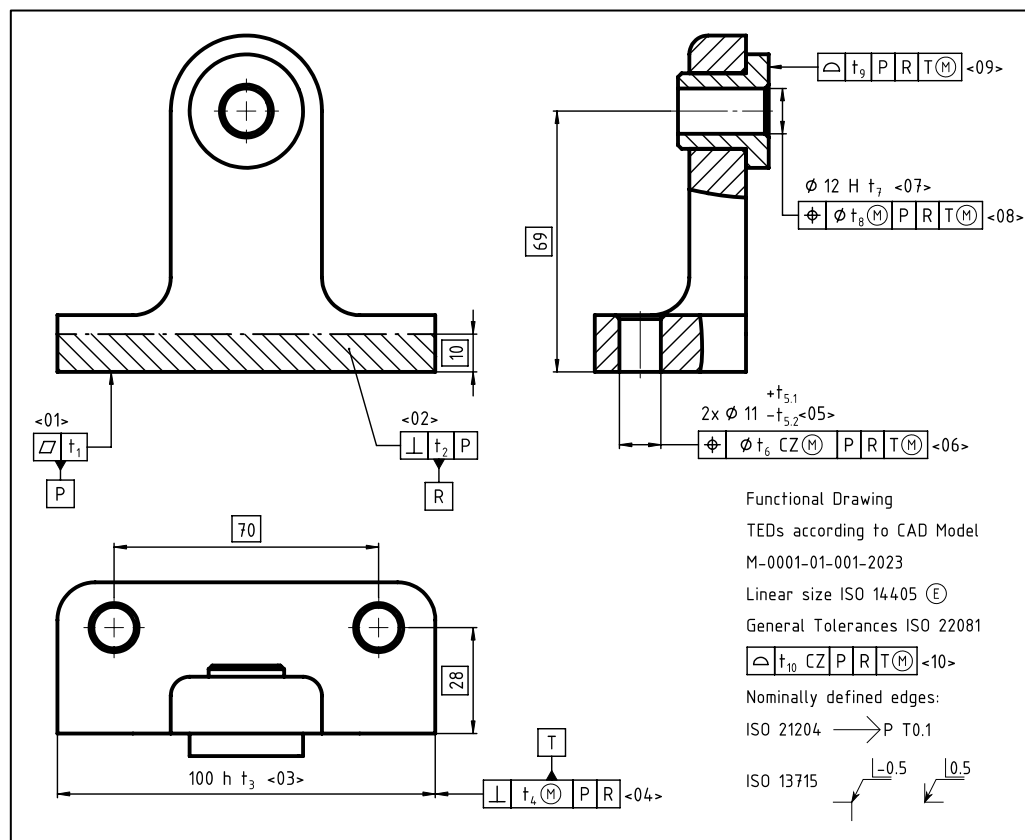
Extract form the “riser_asm” 2D drawing.
